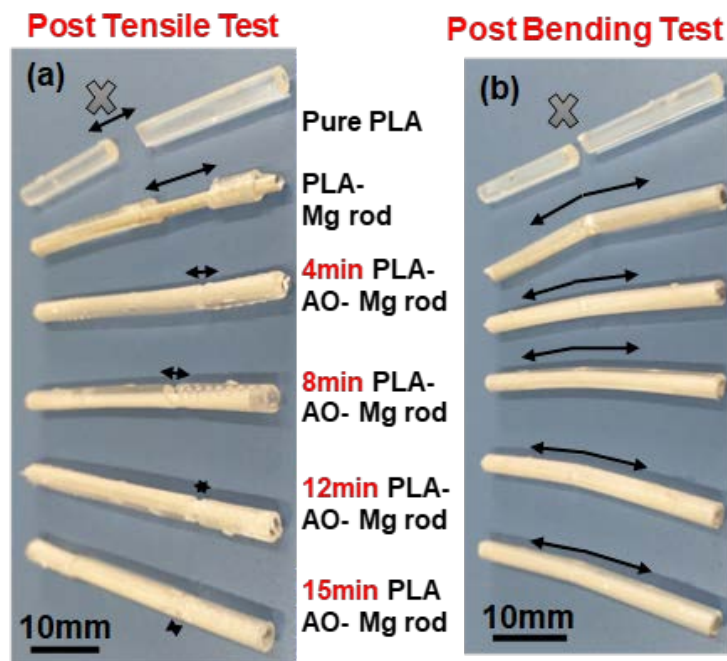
Image of composite rods and pure PLA rod after (a) tensile test and (b) bending test.
